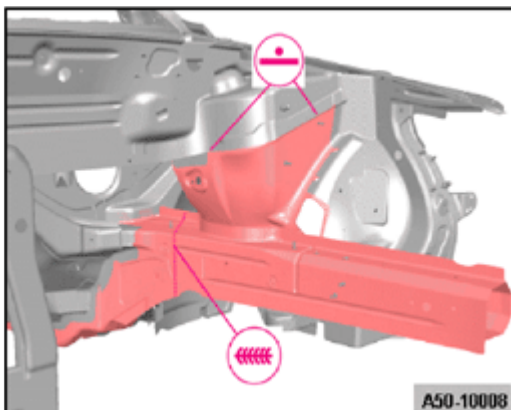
Welding Longitudinal Member And Separating Cut
